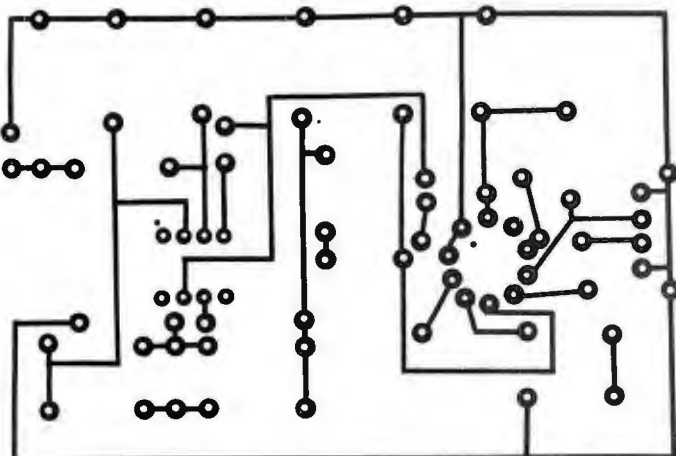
Etching and drilling guide (below) and component placement for pc board (left).
